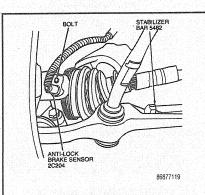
If so equipped, remove the antilock brake sensor and position it aside
